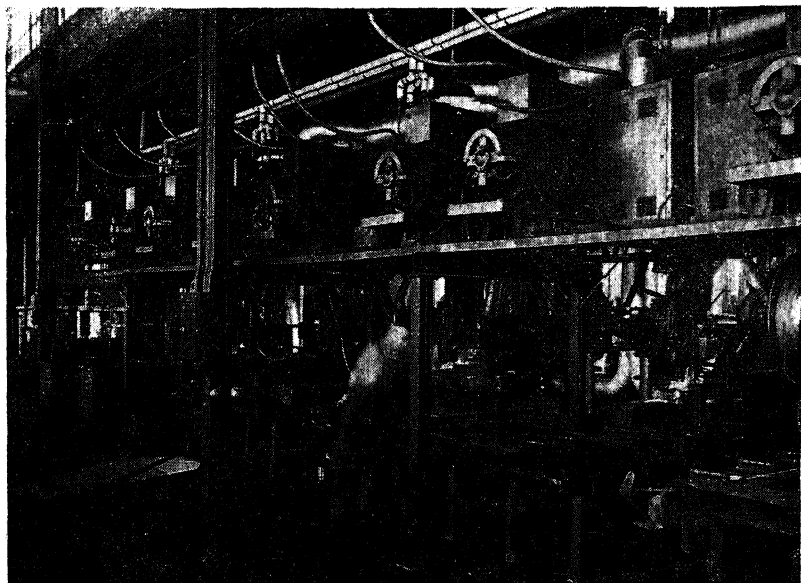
Production line scene showing automatic welding of torque tubes at speed of 2000 feet of tubes per hour.
